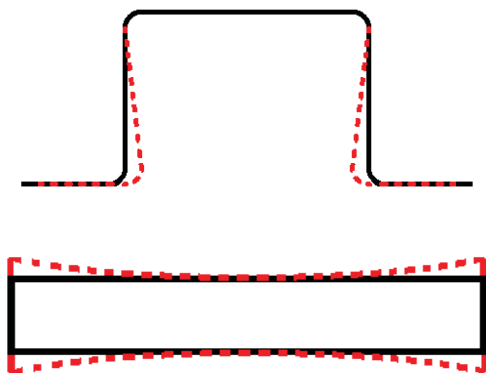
Dominant geometrical distortions occurring after welding for single hat (top) and double hat (bottom). Black line is showing ideal initial shape
